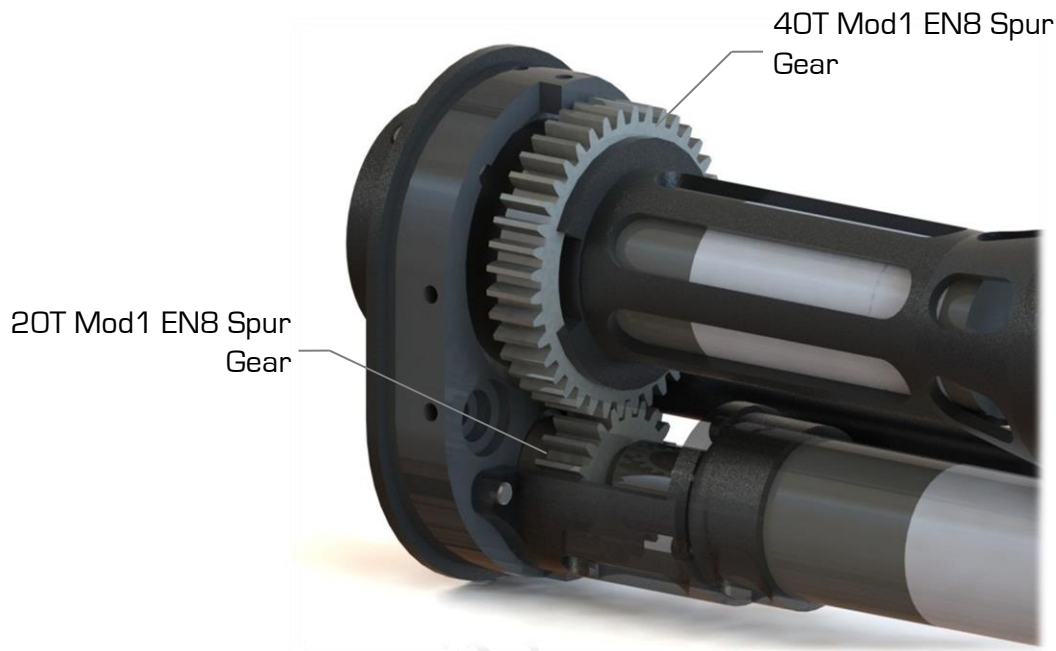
Gear Arrangement to Rotate the Gripper Continuously
